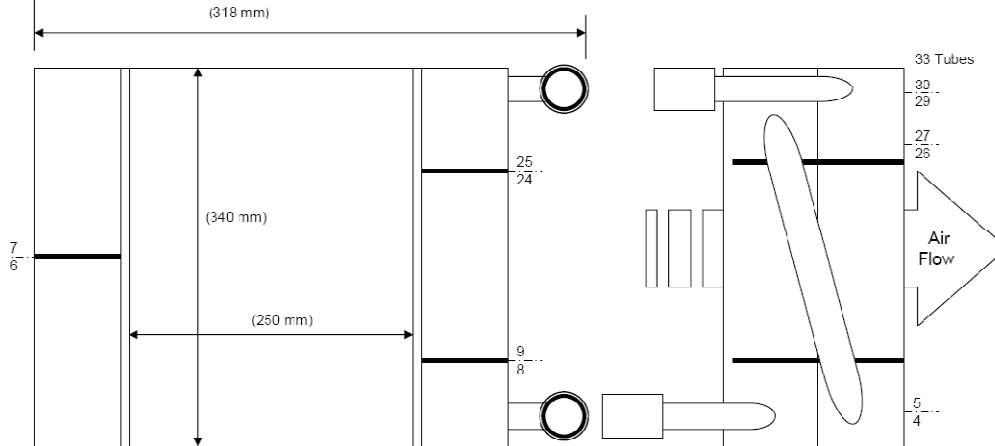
Schematic picture of the 33 tube per row heat exchanger.
